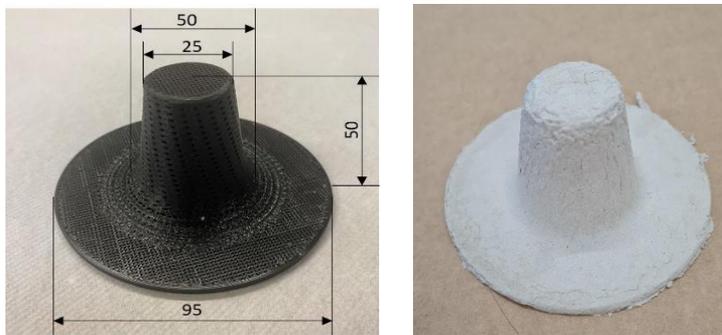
3D-printed mould (left) and final moulded pulp product (right).
